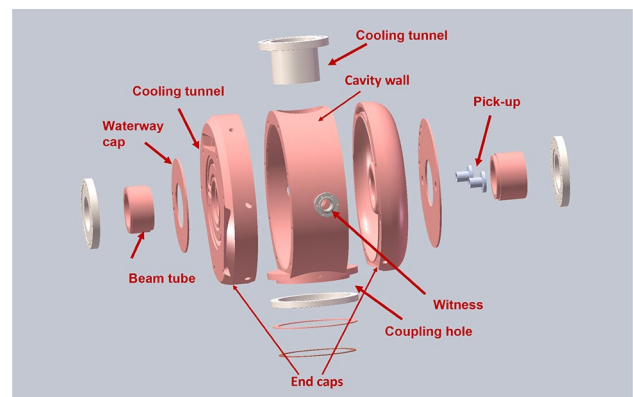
(Color online) RF cavity in processing view with detailed insets.
